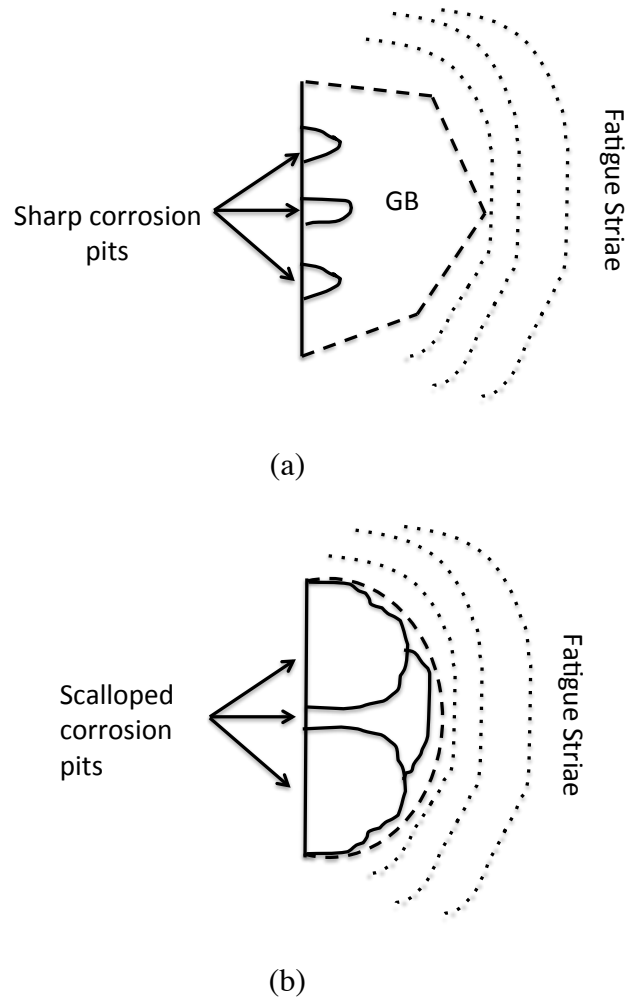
a) 2-day corroded specimen fatigue crack initiation due to flaw created due to grain boundary cracking. b) 24-day corroded specimen fatigue crack initiation due to corrosion flaws
